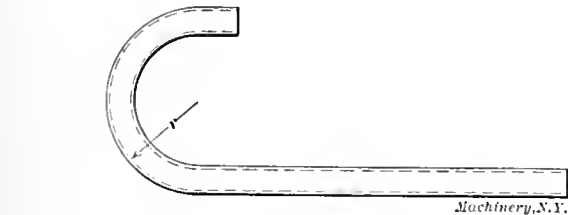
Shape of the Bend produced by the Tools shown in Figs. 2 and 4.
